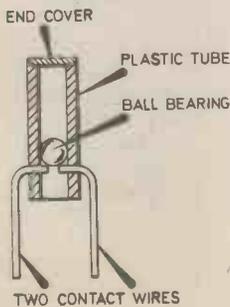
Construction of the gravity switch. Ensure that the ball bearing makes and breaks contact freely.
